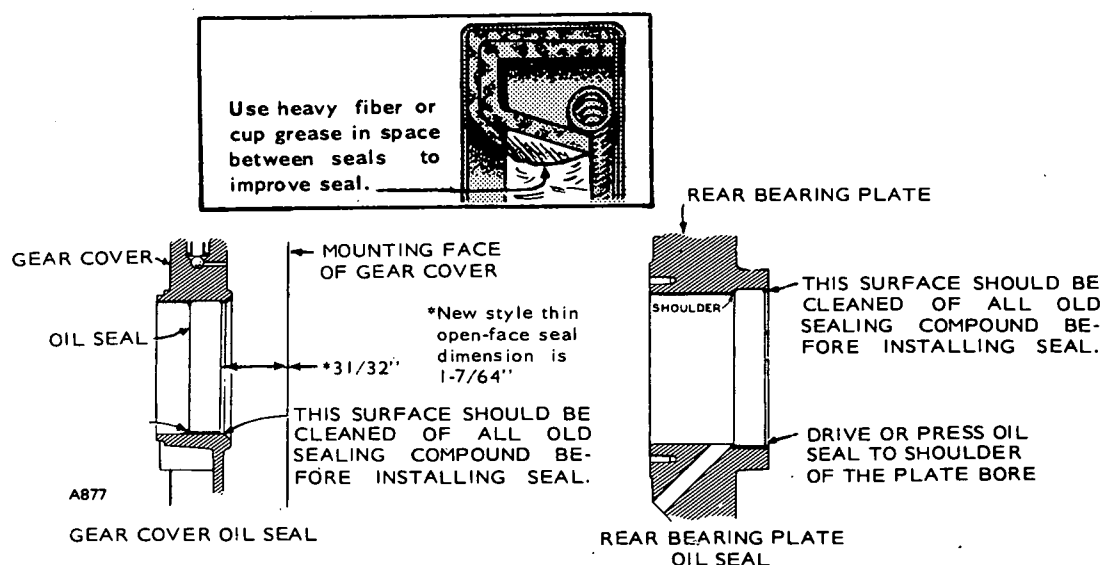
GEAR COVER AND REAR BEARING PLATE OIL SEALS
